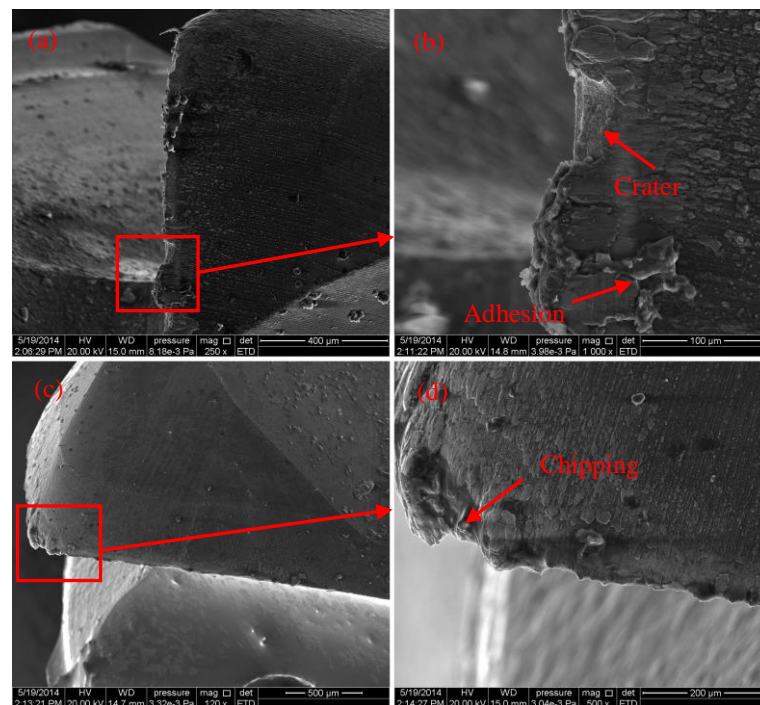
SEM images of the front cutting edge of a failed helical milling cutter
